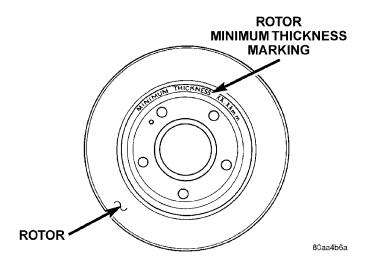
Minimum Brake Rotor Thickness Markings (Typical)
